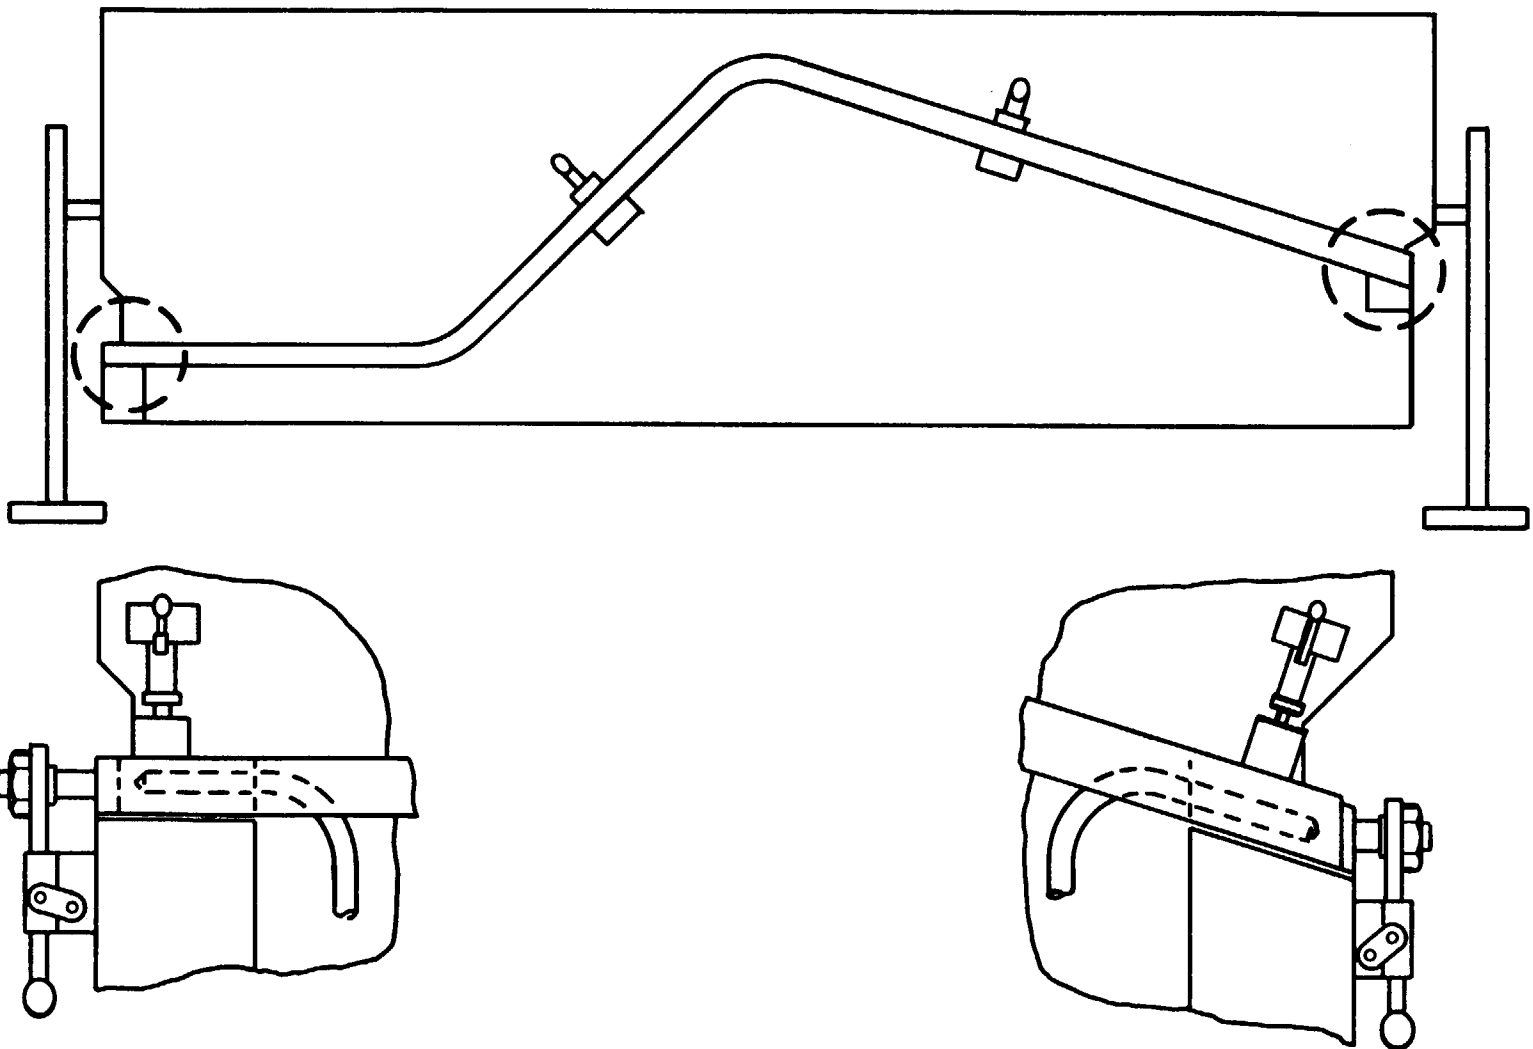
Coolant Tube End-Cap Welding
